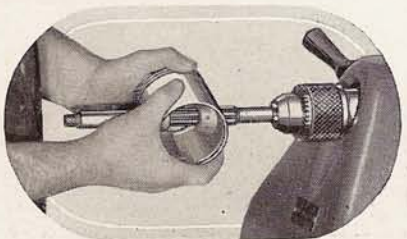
Honing a Piston Pin Hole in a Piston Using Lathe as a Driver.
